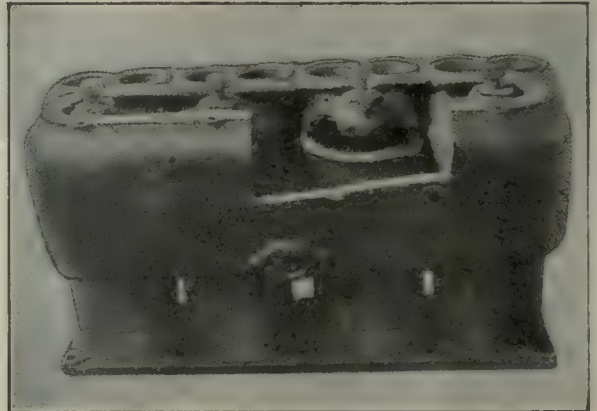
BROKEN AUTOMOBILE CYLINDER
